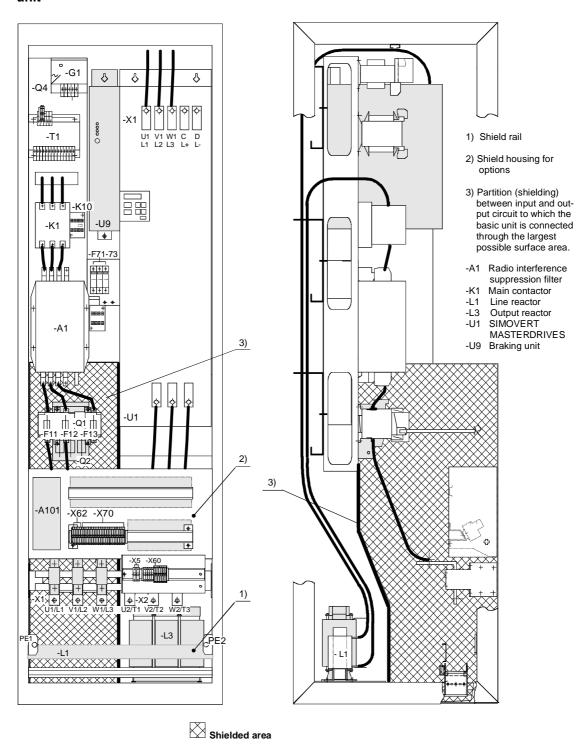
Example of a chassis unit mounted in the cabinet with radio interference suppression filter and line reactor
